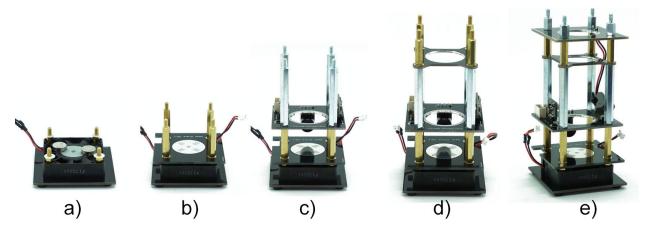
Order of structure assembly. Components used are identified in Fig. 5 and summarised in "Additional Materials" spreadsheet.
